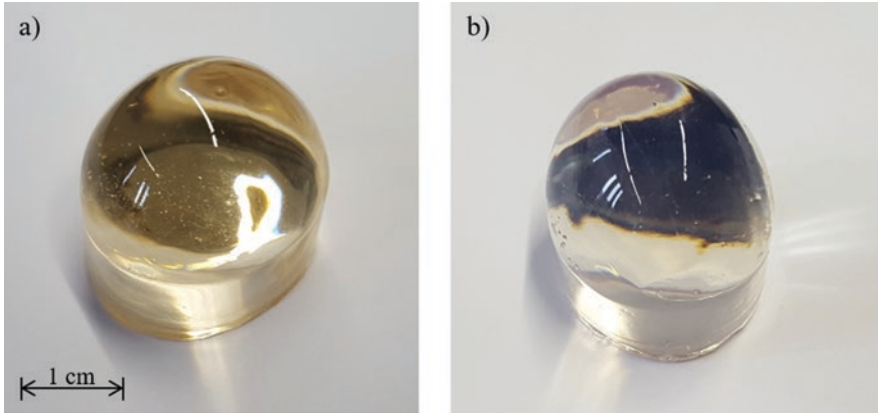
Photographs of additively manufactured transmissive freeform optics. (a) Freeform optical element manufactured using the multijet modeling process (Keyence Agilista 3100 printer). A slight yellowing is visible. (b) Optical element manufactured by stereolithography (Autodesk Ember printer) with the Autodesk PR48 material. Both optics were coated with printing material using a dip coating process and UV-cured after printing
